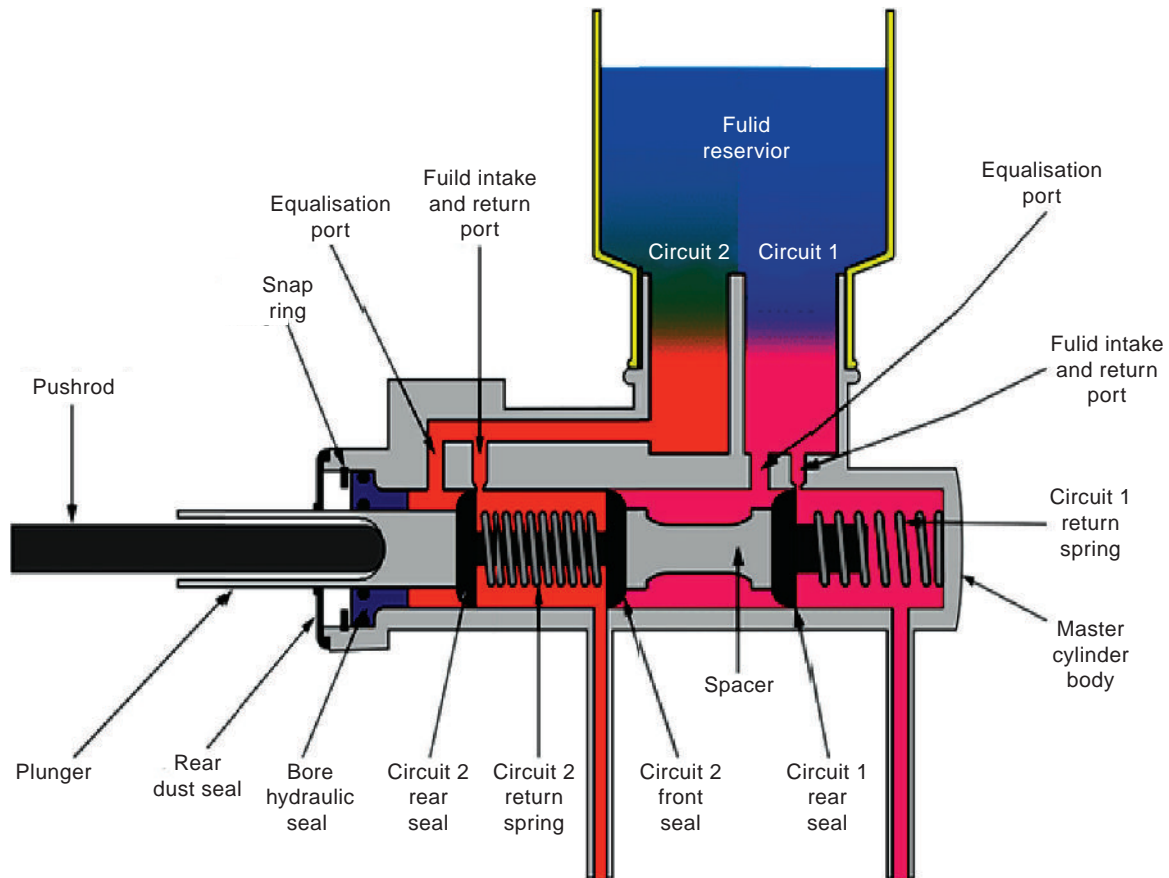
(b) Sectional view of the Tandem master cylinder
